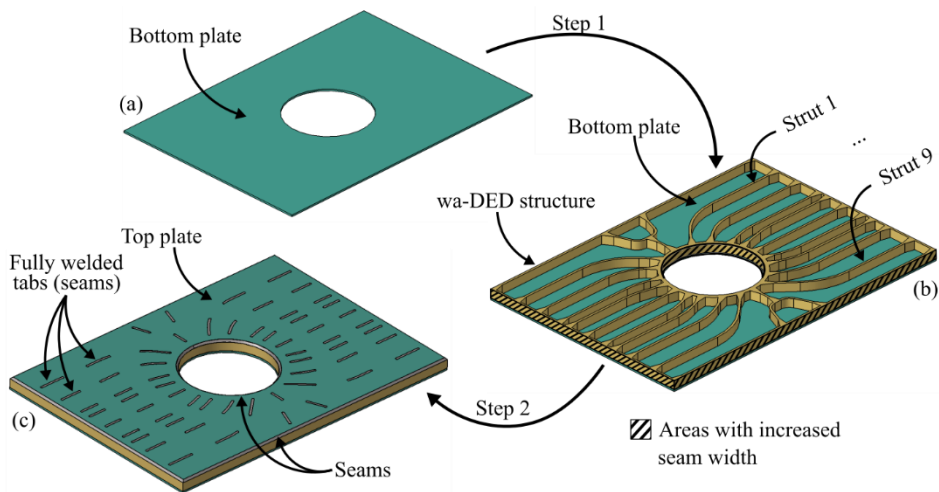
Manufacturing steps for the wa-DED optimized kingpin plate (a) bottom plate (b) wa-DED structure on bottom plate with highlighted machining surfaces (c) final design including top plate
